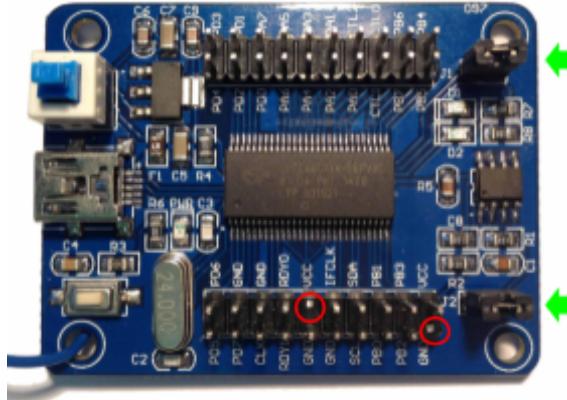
CY7C68013A MINI BOARD - this board with two jumpers (marked with green arrows) HAS TO be modified by pinching off two pins marked with red circles! Otherwise you will damage your board.
